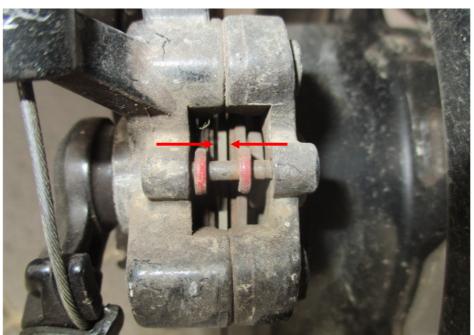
shows the close-up view of the rear brake calliper of the Electric Scooter, which was observed to be intact with no damages. However, the brake pads were observed to be worn (arrowed). Hence the rear tyre was unable to come to a stop after gripping the left hand brake to the fullest.
